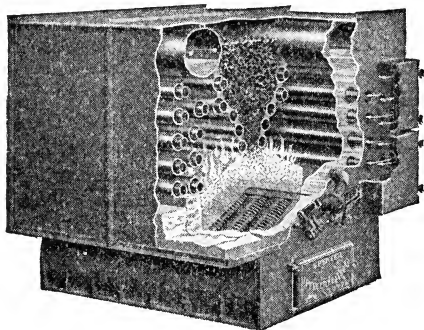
,833.—Spencer double tube magazine feed horizontal boiler showing general construction.
